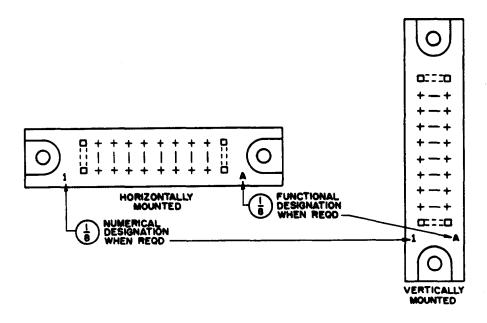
Terminal Strips—259, 280, 276, 277, 284, 285, and Similar Types
